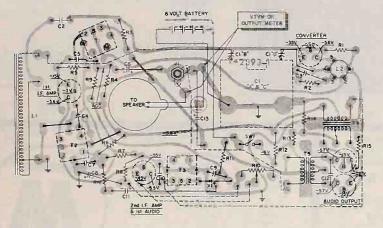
BOTTOM VIEW OF PRINTED CIRCUIT CHASSIS SHOWING COMPONENTS SYMBOLICALLY
